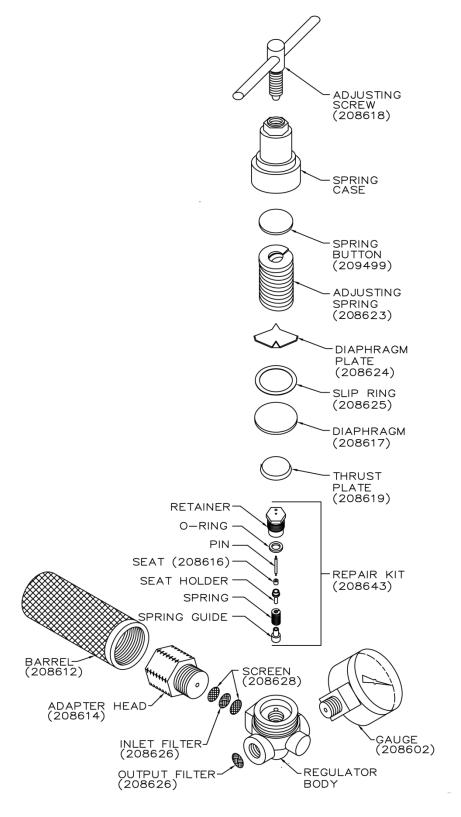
CO₂ Pressure Assembly, P/N 208647
